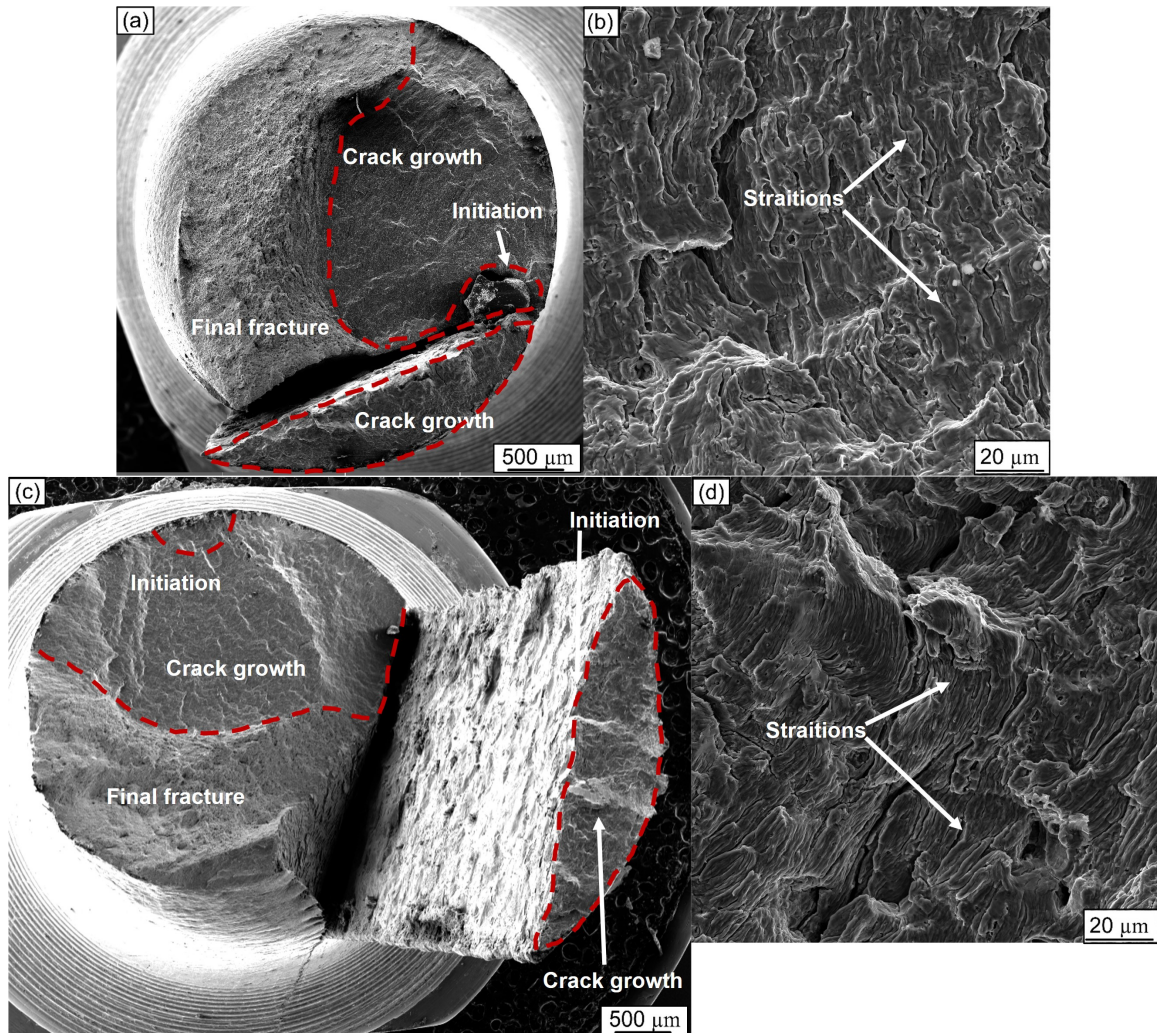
Fractography of specimens with defects: (a) the entire fracture surface Specimen E (b) fatigue striations in Specimen E, (c) the entire fracture surface Specimen F, and (d) fatigue striations in Specimen F
